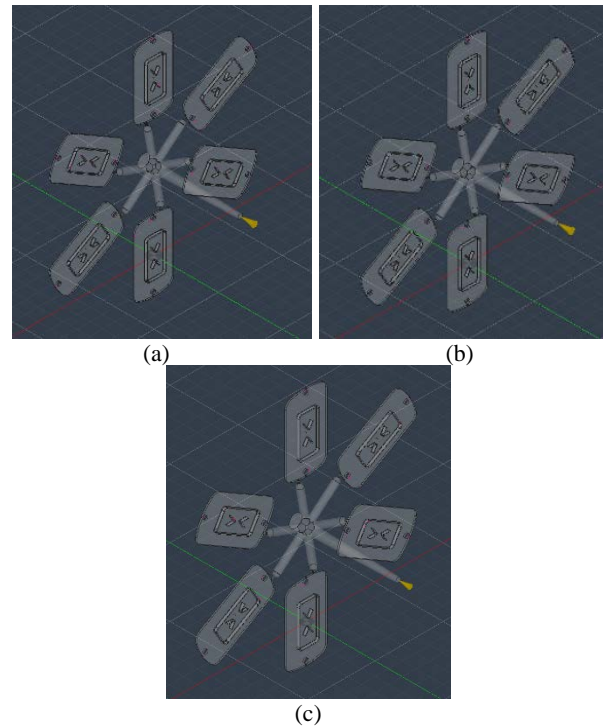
Weld Line Defect, (a) Low ; (b) Medium ; (c) High
